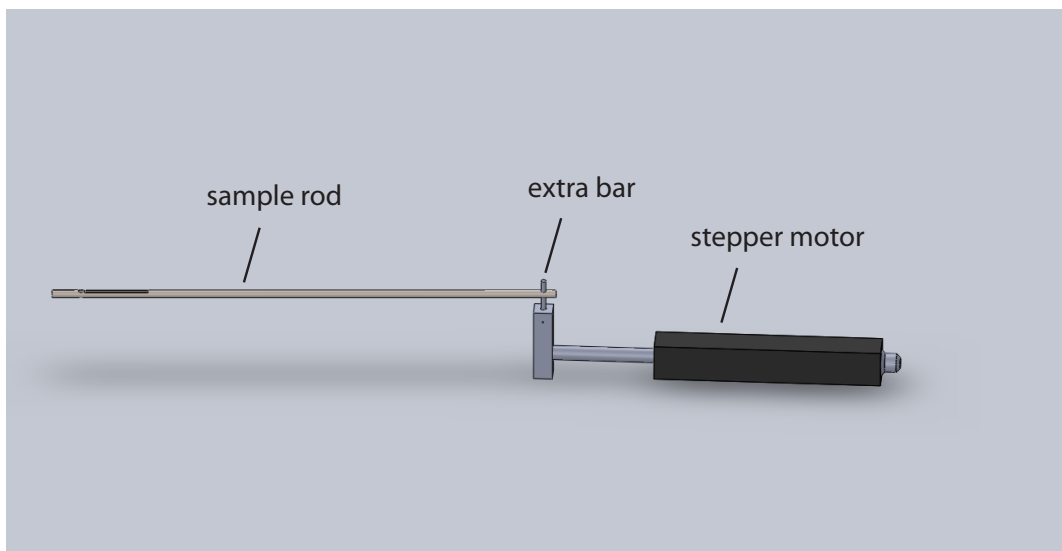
The configuration of the sample rod and the designed fixation part in order to be used with the motor. The sample rod is fixed by the extra bar via the mini-rail and at the same time is fixed inside the fixation part to the motor.
